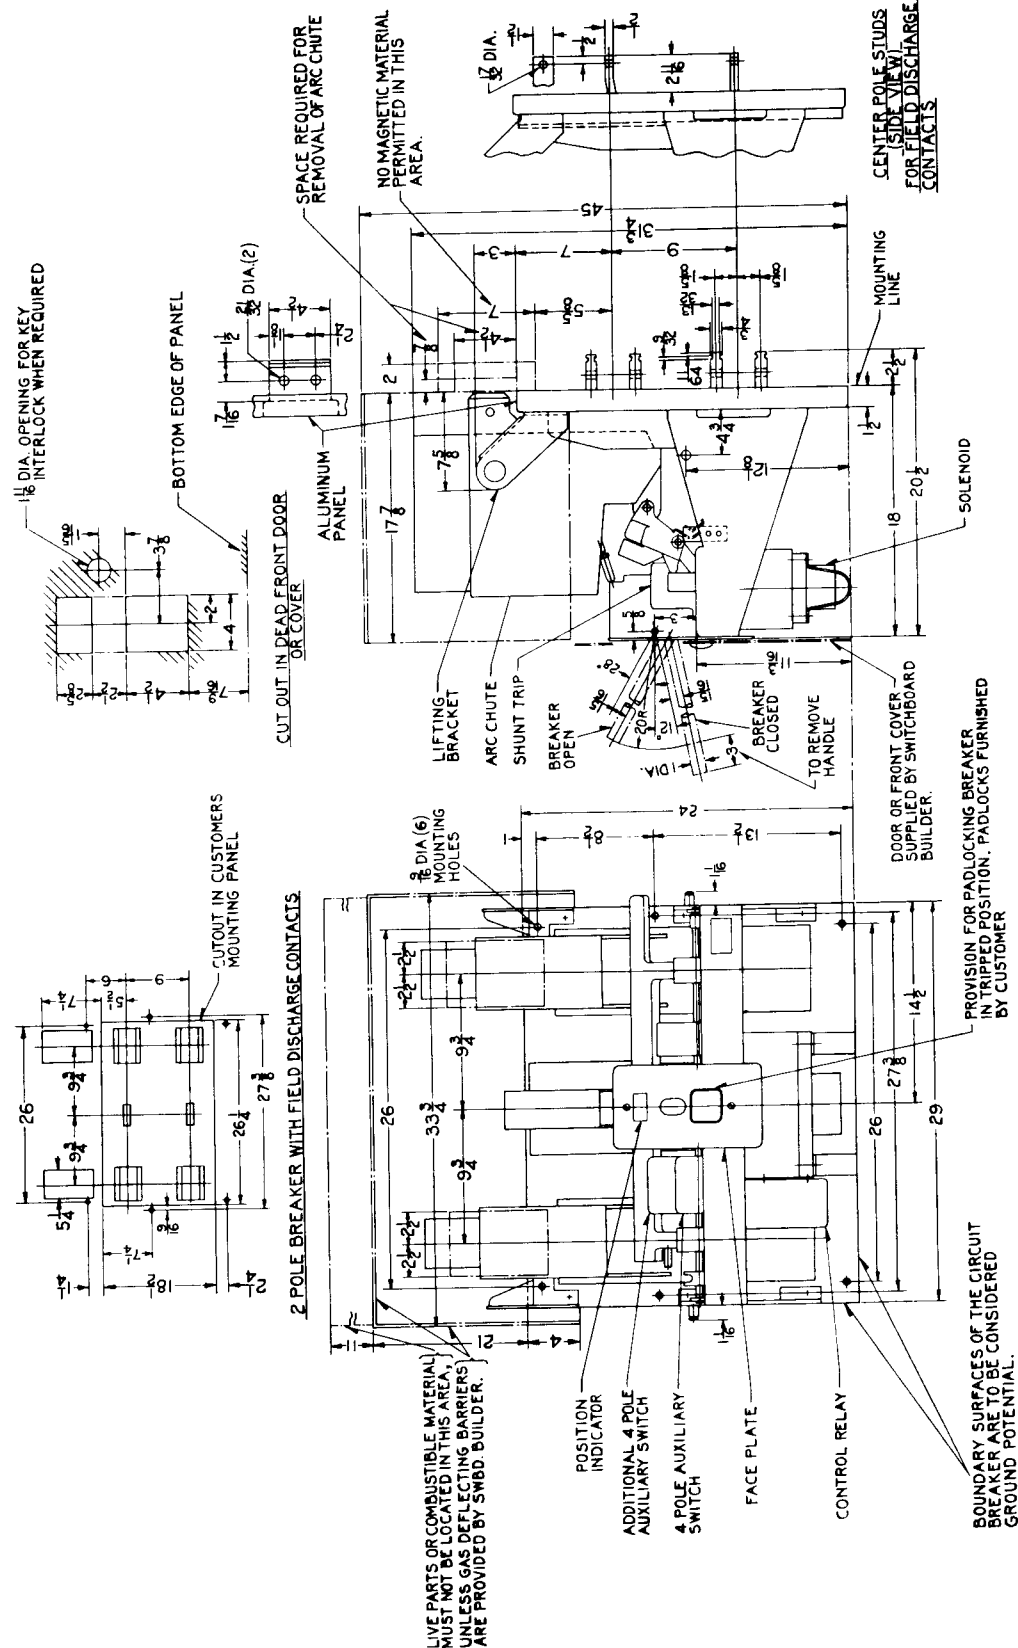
B. Type DBF-40 Outline and Mounting Dimensions
